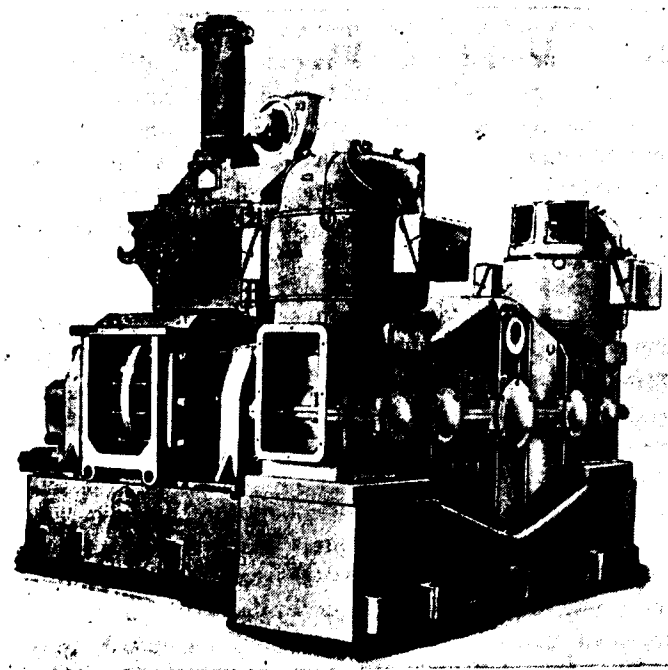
Gearing type ULUZ with built-on motors. (45812)
